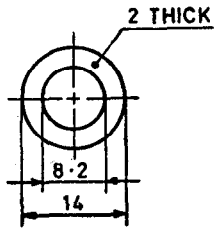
(B) CONNECTING LUG (FOR 36 kV/2 000 AND 3 150 A RATING)
